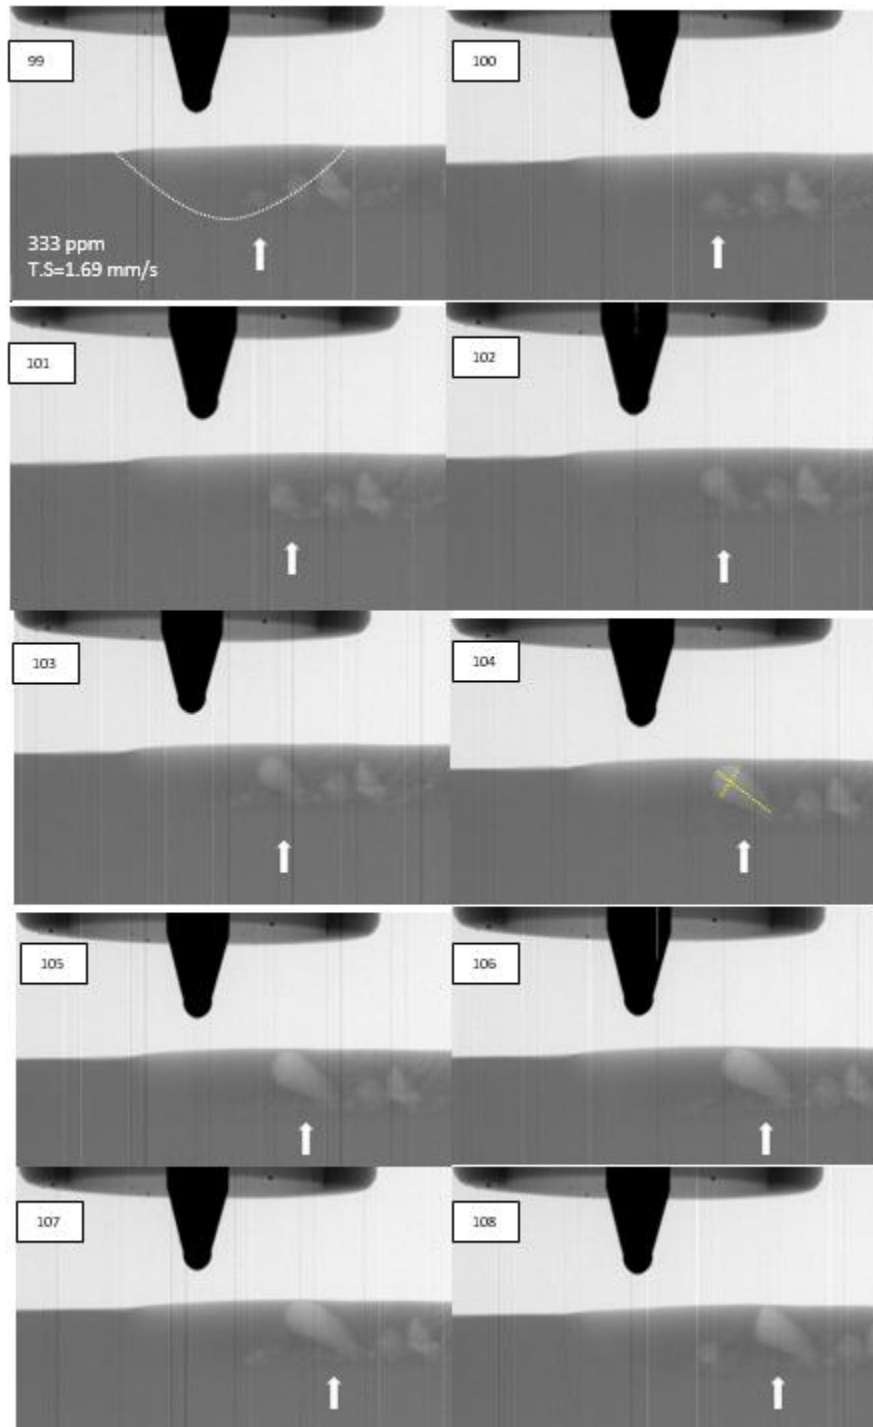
Alloy 1100 welded using 333 ppm of shielding gas hydrogen at 1.69 mm/s.
